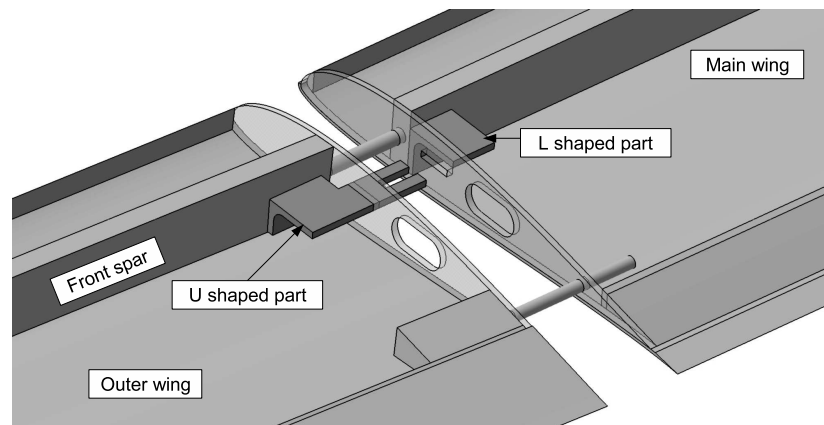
Fastener mechanism at the wing connection (isometric view)
